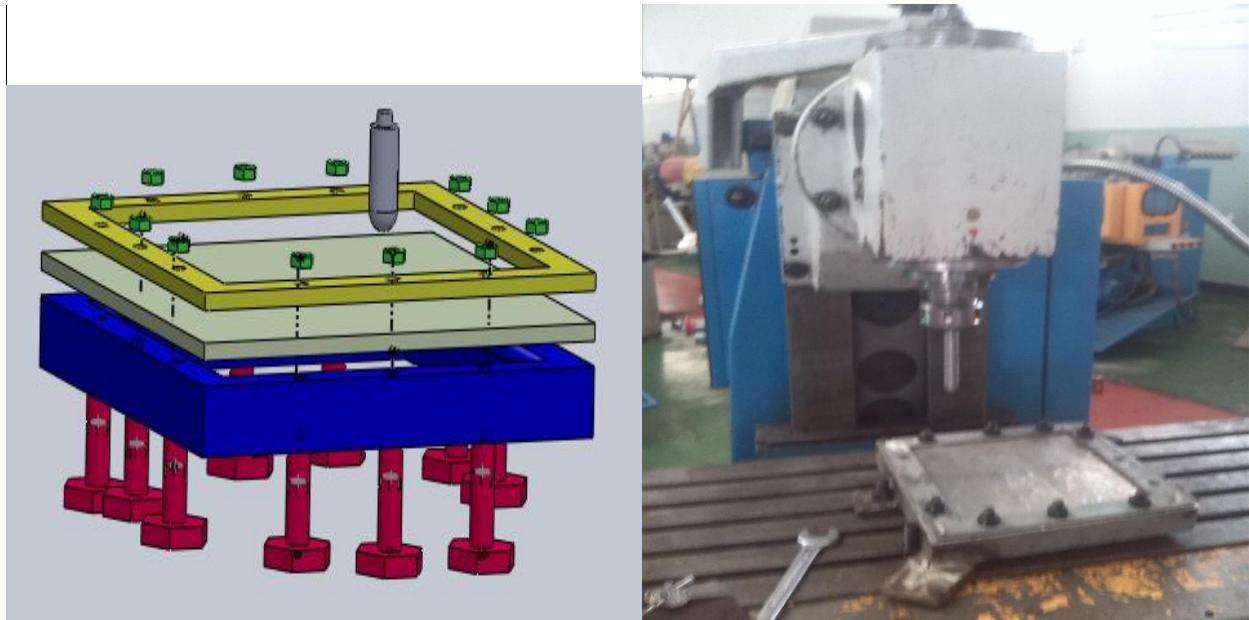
10 exploded model for complete set up for SPIF (a) and practical assembly of sheet and blank holding device with milling slot (b)
